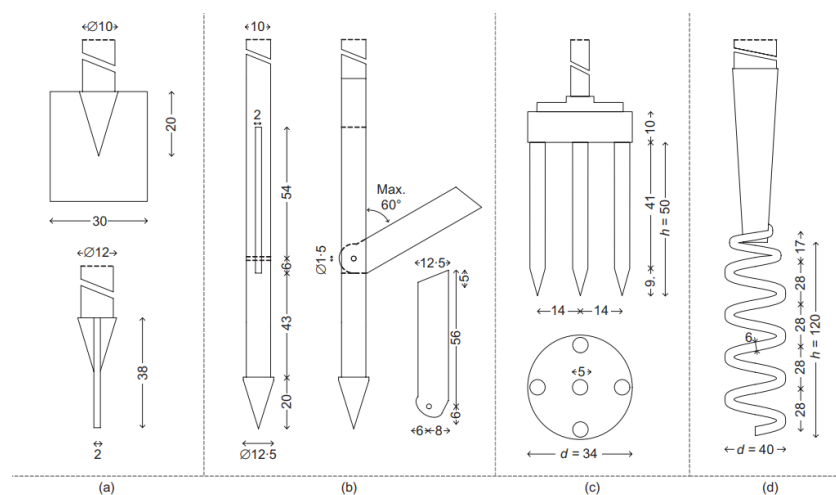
(a) blade penetrometer; (b) pull-up; (c) pin vane; (d) corkscrew. The dimensions are in mm (G. Meijer et al., 2016).
